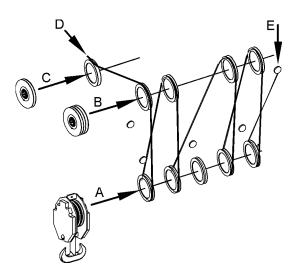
1507 jib head section rope reeving system (load position 1)
